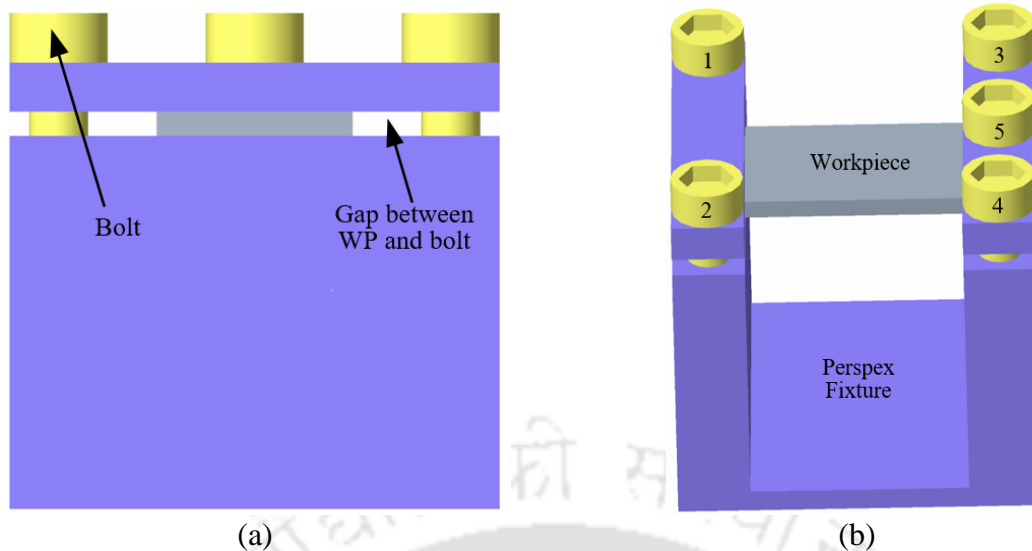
Workpiece holder (a) Side view (b) Isometric view
